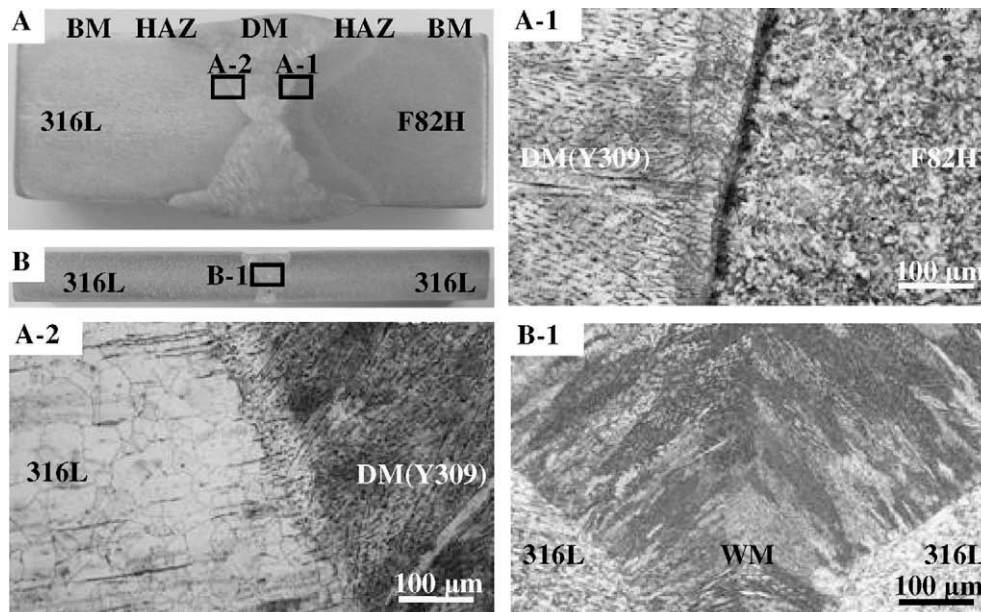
Macrostructure and microstructure of welds. (A) Cross-sectional macrostructure of F82H/316L weld. (B) Cross-sectional macrostructure of 316L/316L weld. A-1: Bond between DM (Y309) and F82H. A-2: Bond between DM (Y309) and 316L. B-1: Each bond between WM and 316L in B.
